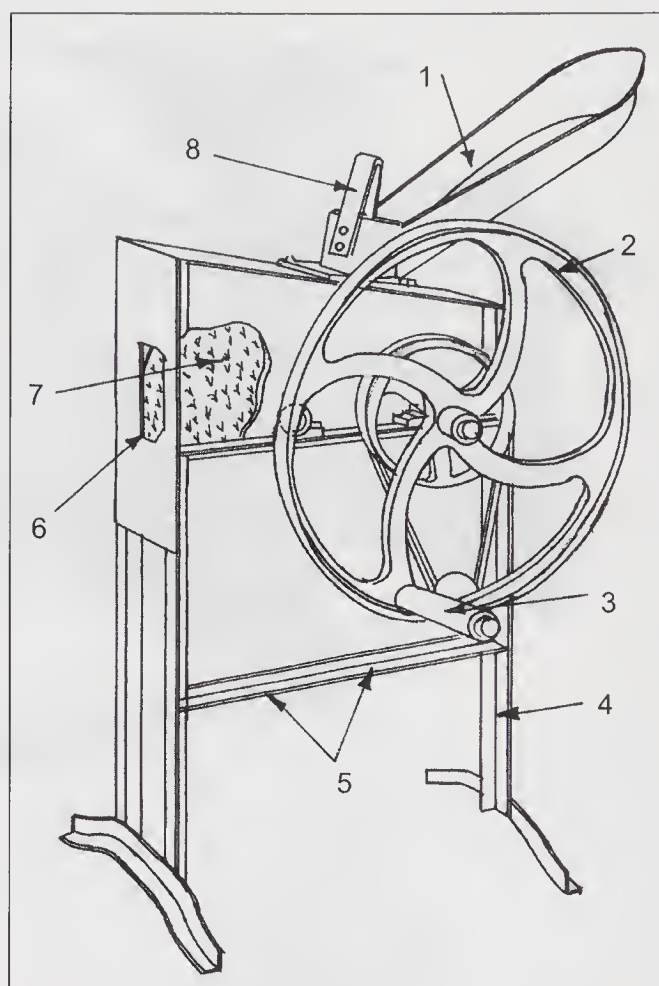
Hand operated maize sheller of gear type. 1, Feeding tray; 2, Flywheel; 3, Operating handle; 4, Frame; 5, Grain outlet; 6, Cob heart outlet; 7, Shelling disc; and 8, Feed control.
